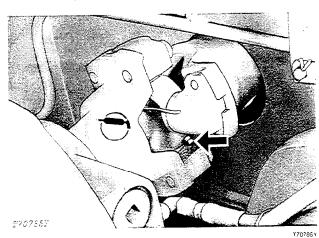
Transmission Drive Shaft Universal Joints and Tube (rear joint) (1 point)
